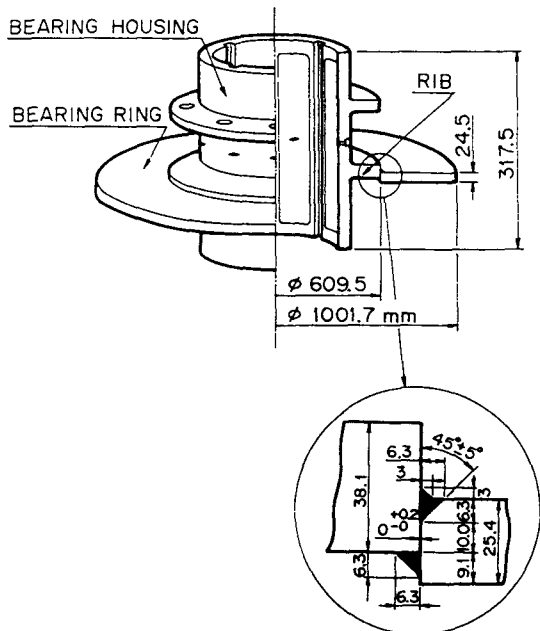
Welding design of fillet welded joint in hydrostatic bearing.
